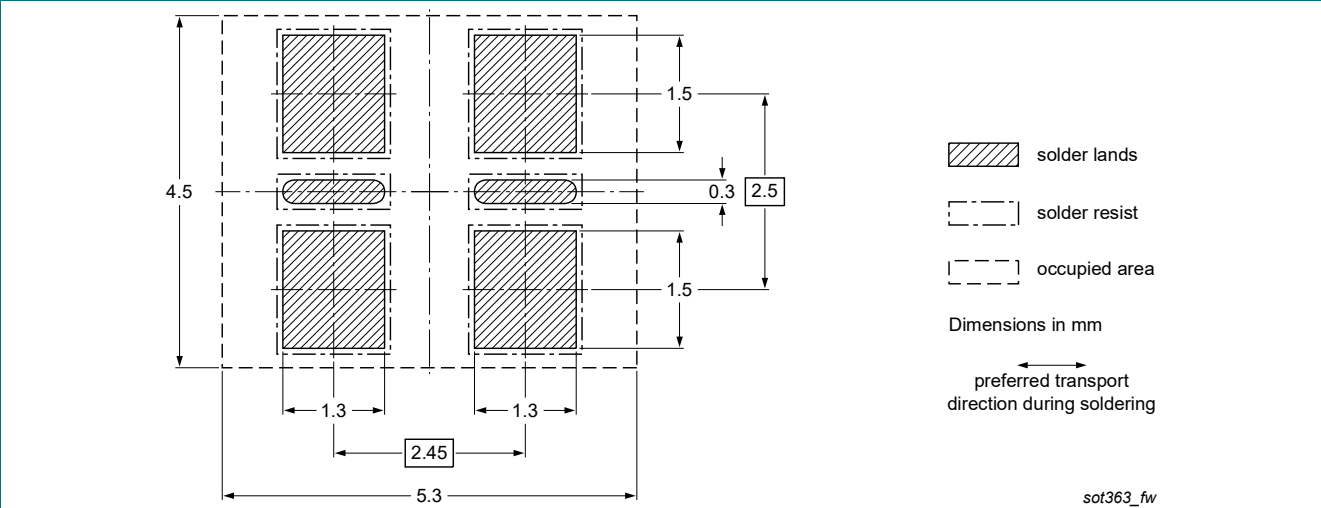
Wave soldering footprint for TSSOP6 (SOT363)
